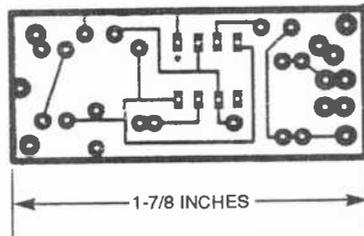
If you'd like to etch your own PC board for the Control module, use this full-size template.
